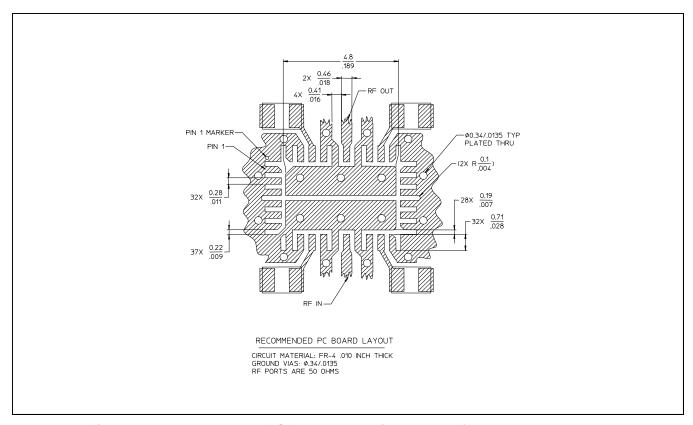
Recommended PC Board Mounting Pattern for Vector Modulators
